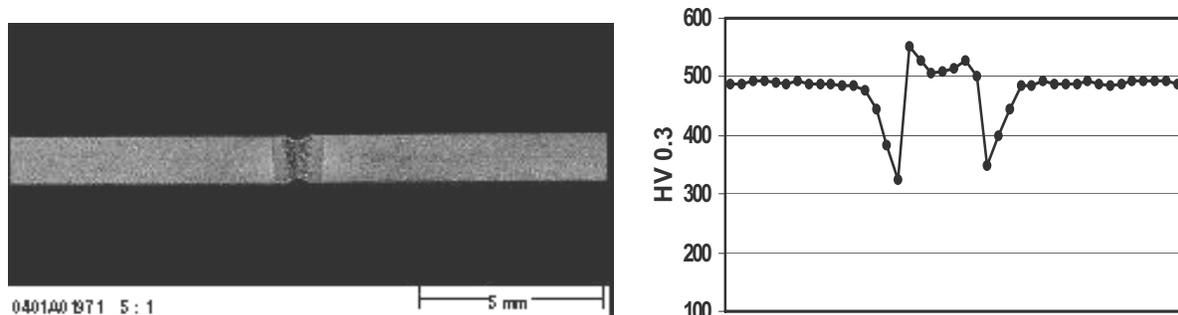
Hardness scan across a laser weld seam applied to hot forming steel (22MnB5) after quench hardening.
